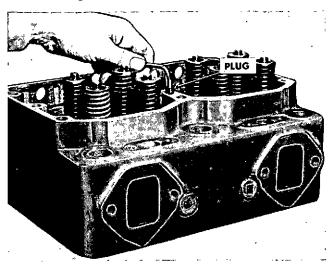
Plugging cylinder head breather hole - H/NH
